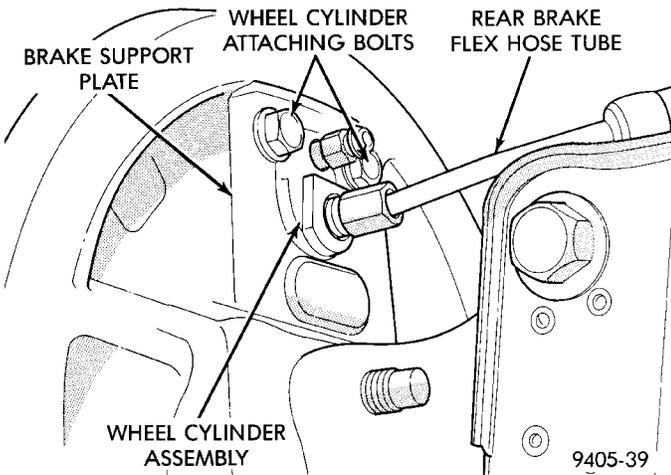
Brake Flex Hose Tube At Wheel Cylinder
